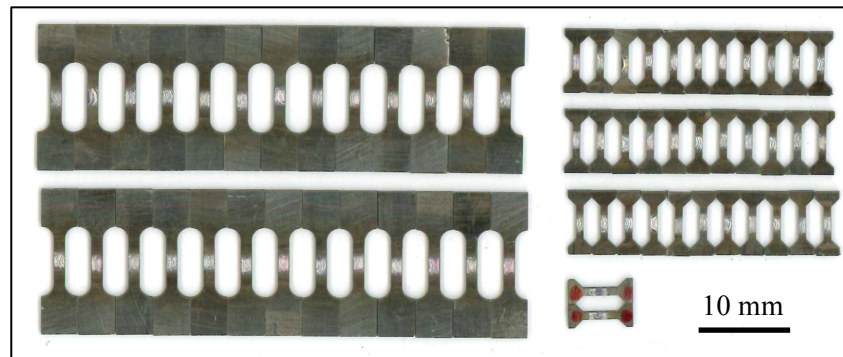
Image of welded C37M specimens prior to surface machining. Red dots denote specimens with fusion zones far from the center of the gauge region of the specimen.
